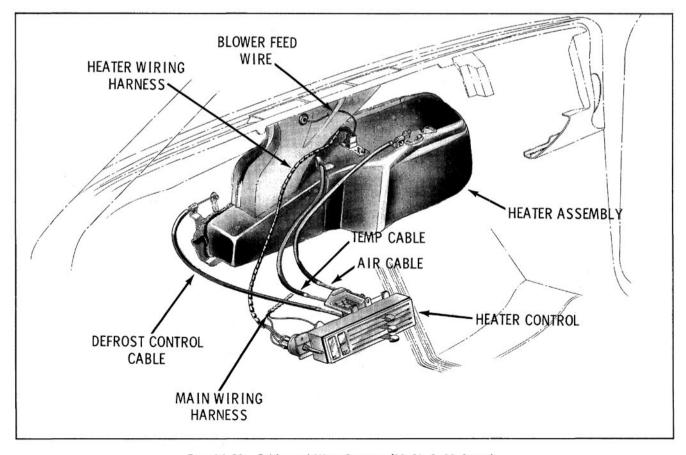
Cable and Wire Routing (30-31 & 32 Series)
